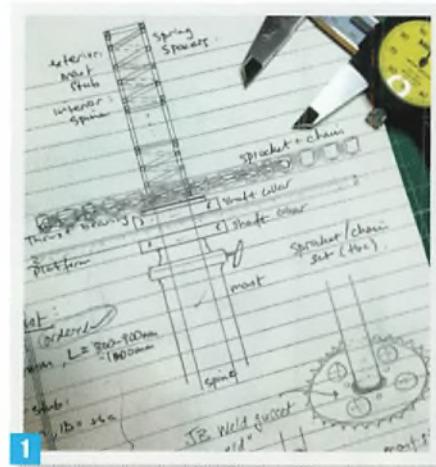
Early drawing of the rotator with chain-drive. Note the lack of motor position yet! Fig. 2: Wiper motor with drive gear. Note the splined shoulder to be ground into the gear.
